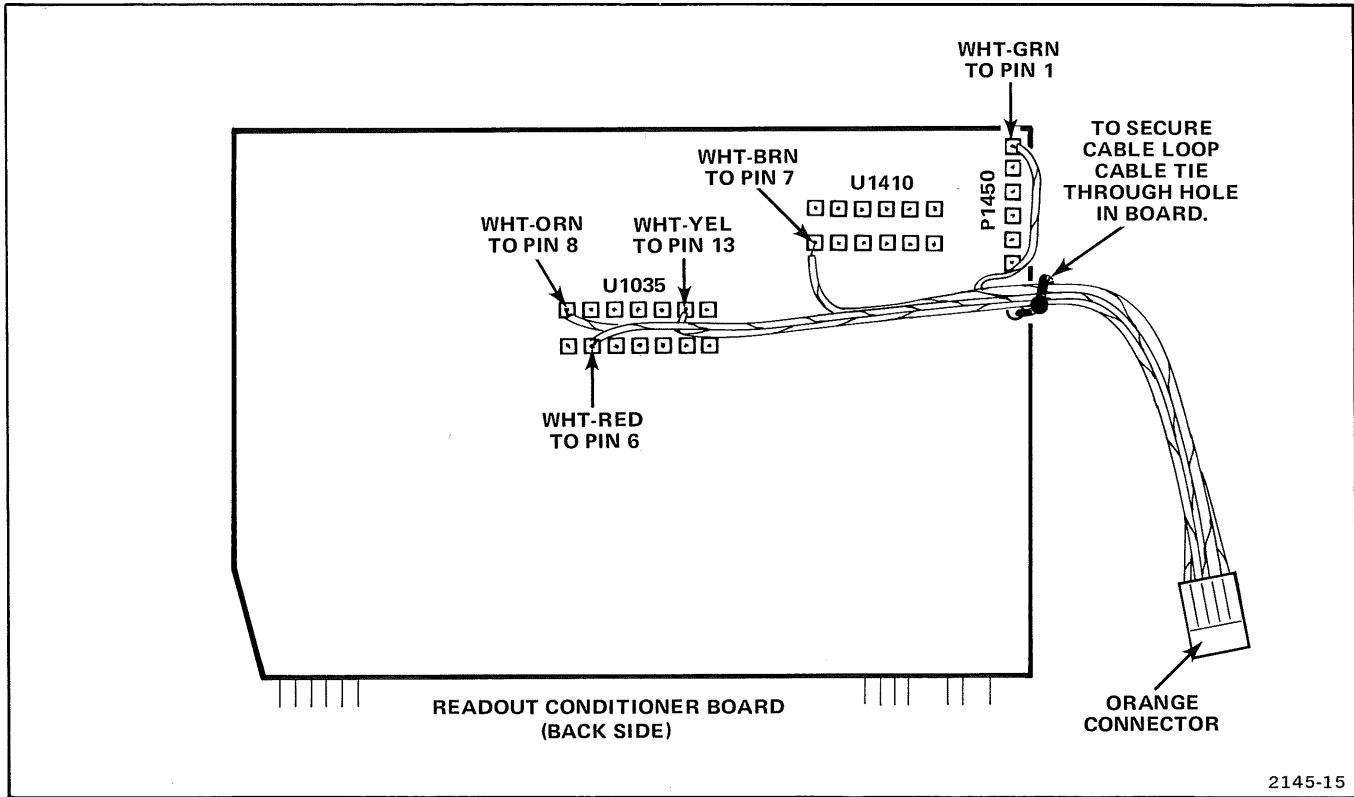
Installing 5-wire cable to 414 Option 20 (MOD XA) Readout Conditioner Board.
